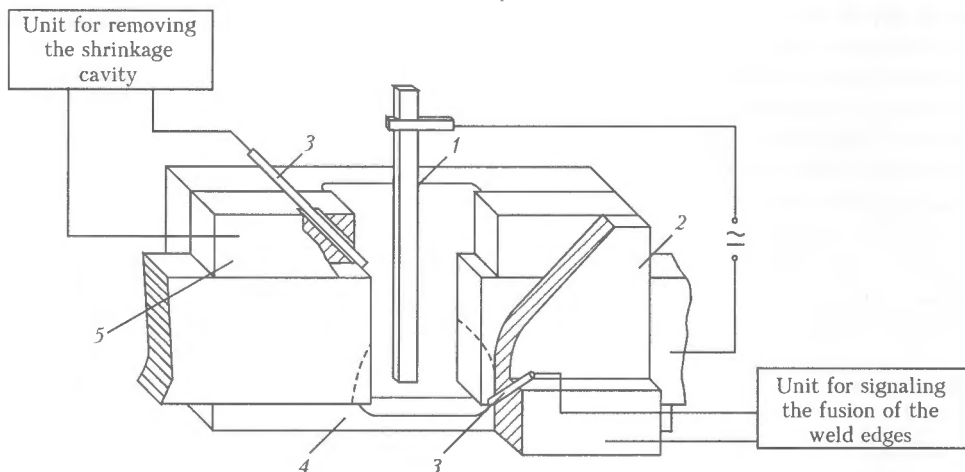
Diagram of the ESW welding complex with devices for weld formation: 1 – consumable electrode; 2 – front cover plate of the forming water-cooled device; 3 – probe; 4 – run-on tub; 5 – run-off tab
